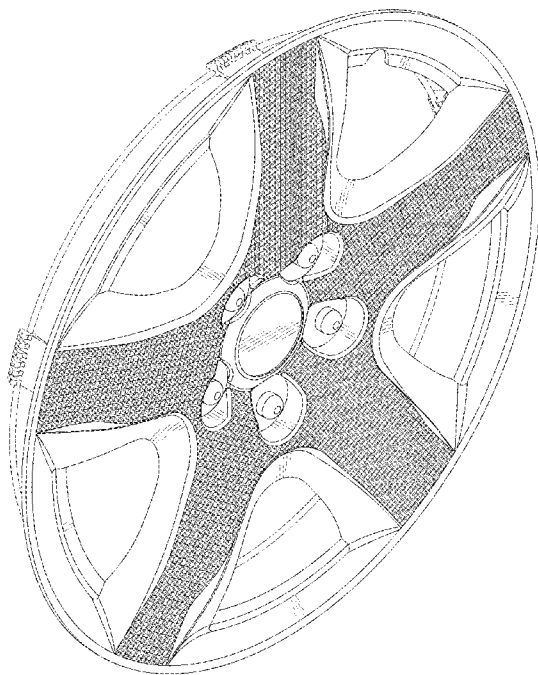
is a perspective view of a disk wheel cover showing my new design;
